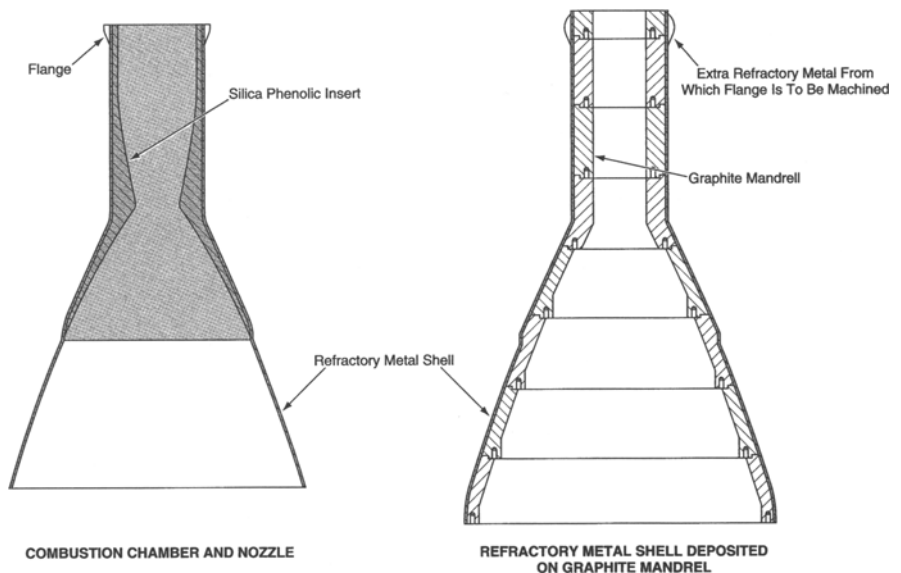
The combustion chamber and nozzle would be made in only two pieces: a refractory metal shell with a silica phenolic insert bonded inside.
